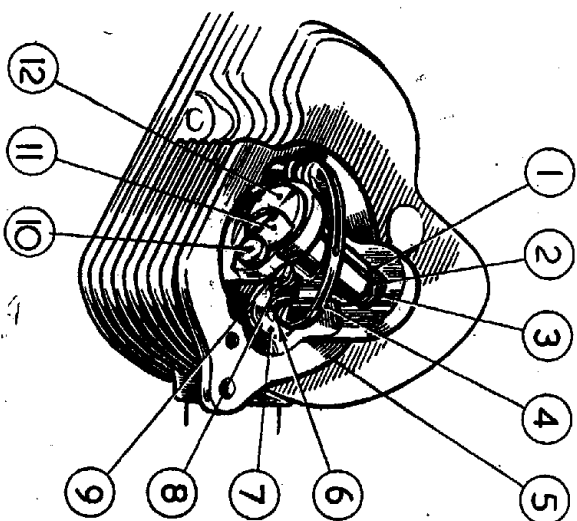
THE COMPONENTS OF THE O.H.V. ROCKER GEAR.
